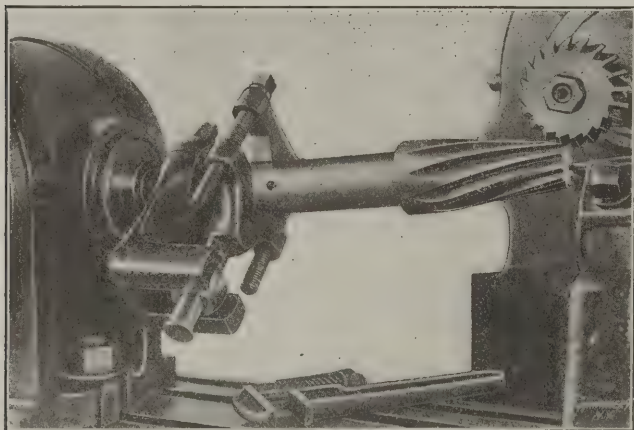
Ready Tool Co.'s Milling Machine Dog
